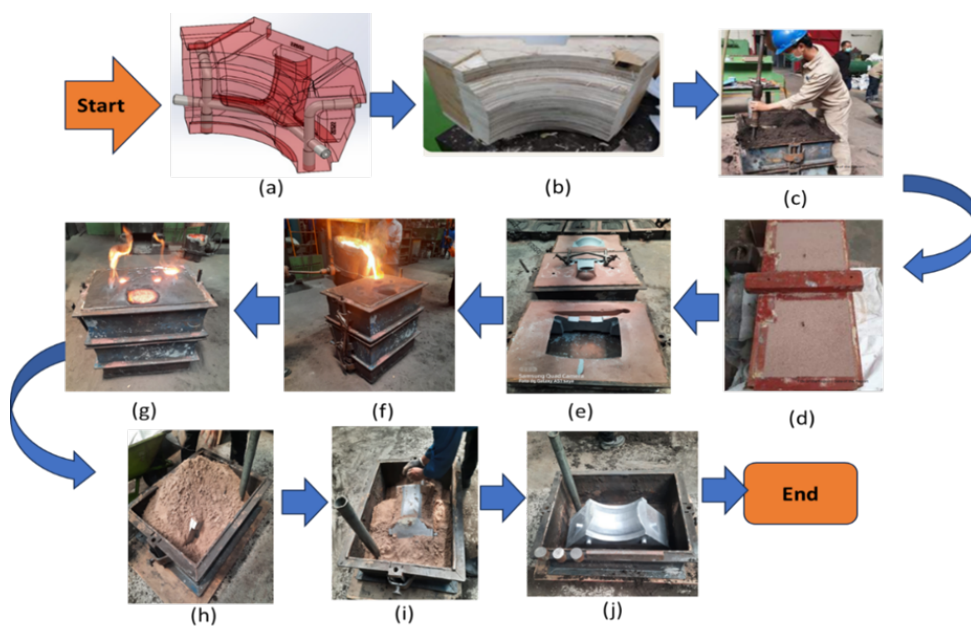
Stages of side core mold manufacturing process: a – project design; b – Pola/Patten; c – die manufacture; d – core manufacture; e – furnace preparation; f – casting; g – solidification; h – sand mold disassembly; i – visual check; j – finishing side core.
